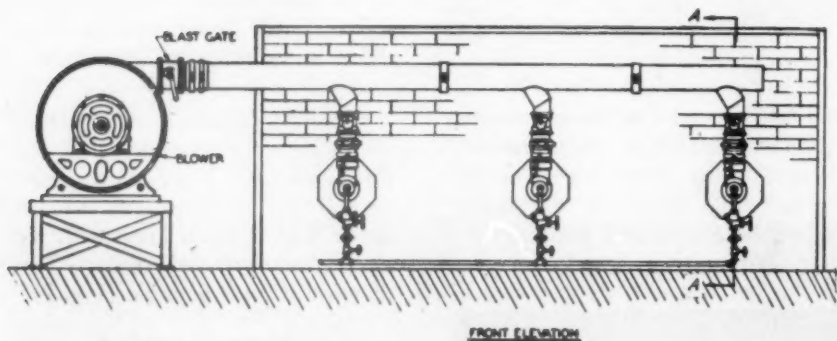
GENERAL LAYOUT OF A WALL LADLE PREHEATER.
